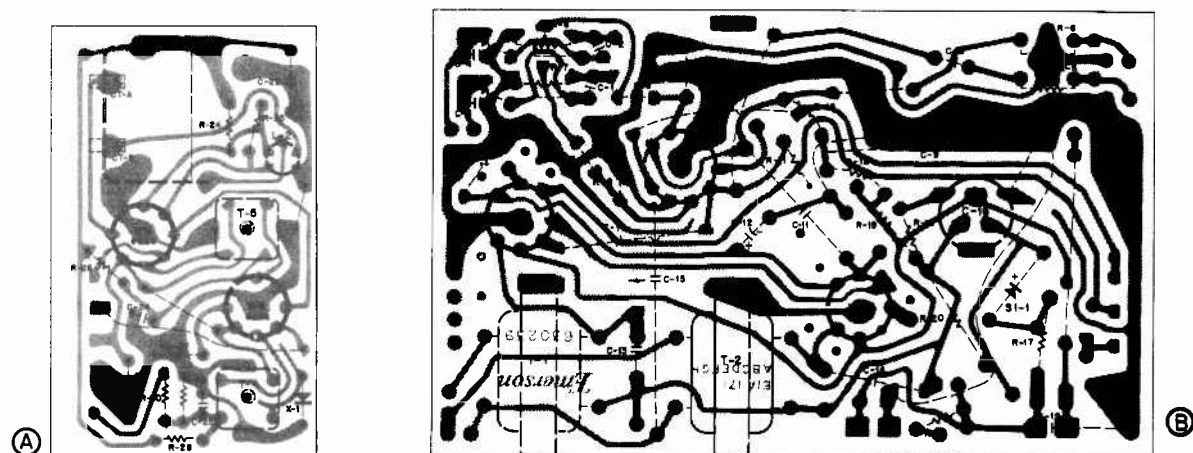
A, B - ETCHED PRINTED CIRCUIT SECTION (BOT. VIEW) CH. 120574-B; (A) AM SECTION (B) AUDIO SECTION
